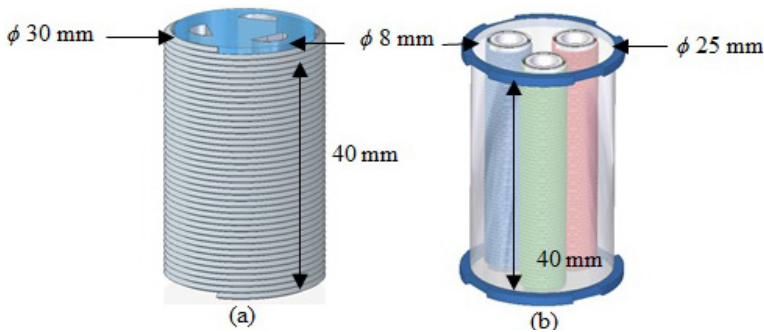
(a) Prototype 1 (crimped braided sheath) and (b) prototype 2 (nylon threaded chambers)
